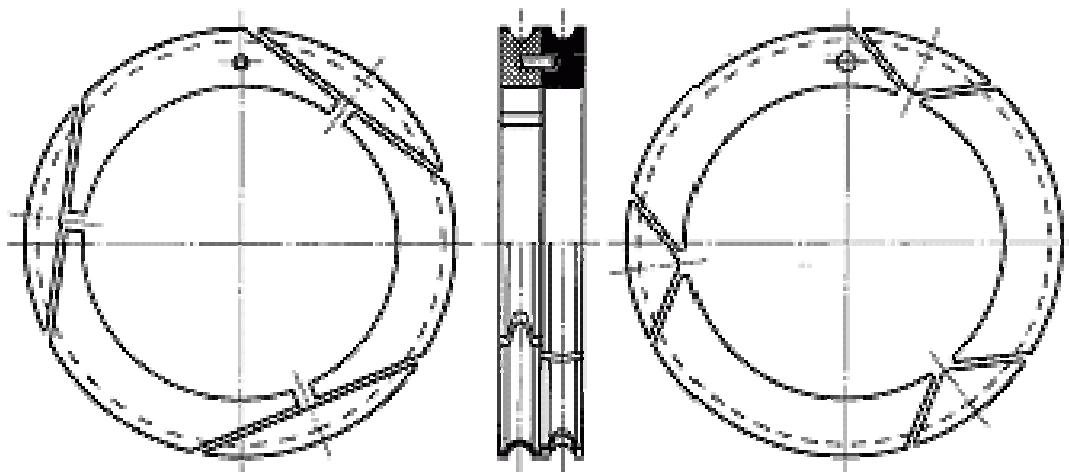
Carbon sealing rings with non-radially cut segment joints
